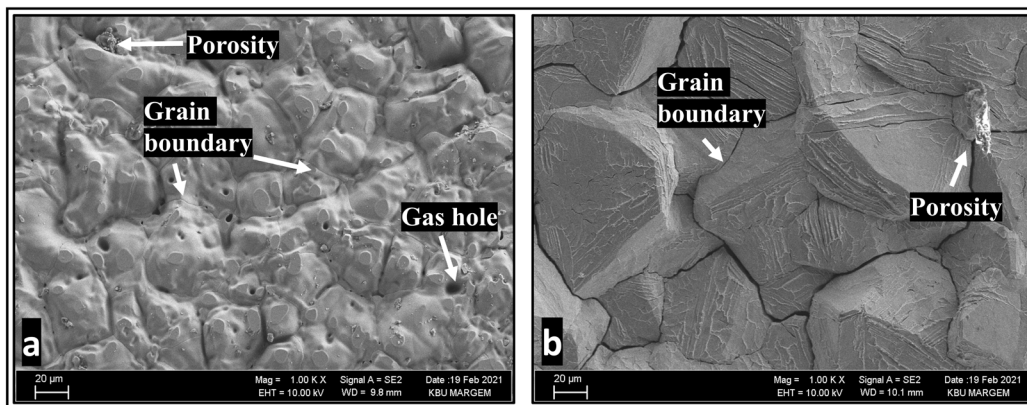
Sintered part (1300°C) (a) surface and (b) sintered part fracture surface
